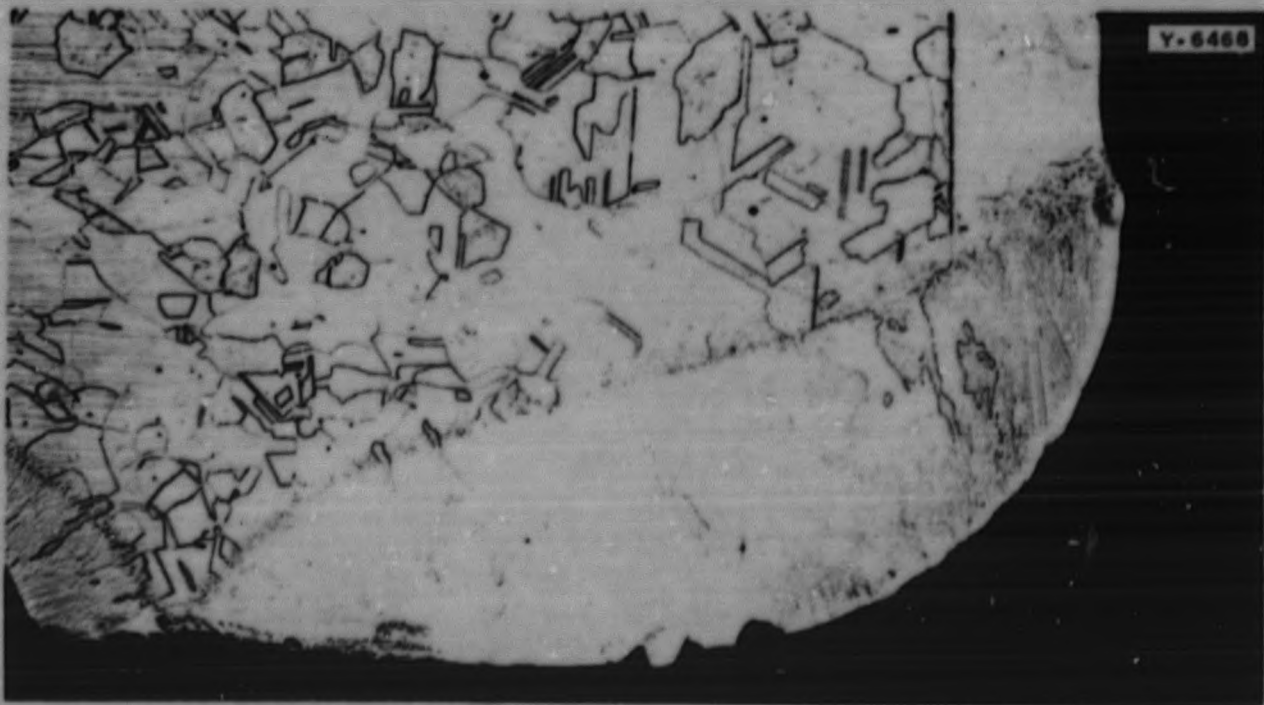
Transverse Section of a Typical Tube-to-Header Cone-Arc Weld of 1/8-in. Type-304 Stainless Steel Header Sheets and Type-316 Stainless Steel Tubes, 0.10 in. OD, 0.010-in. Wall Thickness. 10X.
